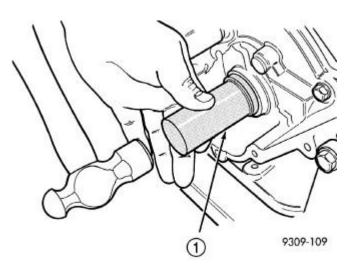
Crankshaft Oil Seal With Special Tool 6342 - Installation Courtesy of CHRYSLER LLC
